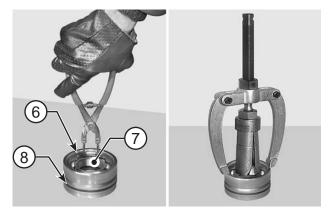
Remove the bearing (7) snap ring (6). Remove the o-ring (8) and, using a puller for inner parts, remove the bearing (7) and seal ring (9).
